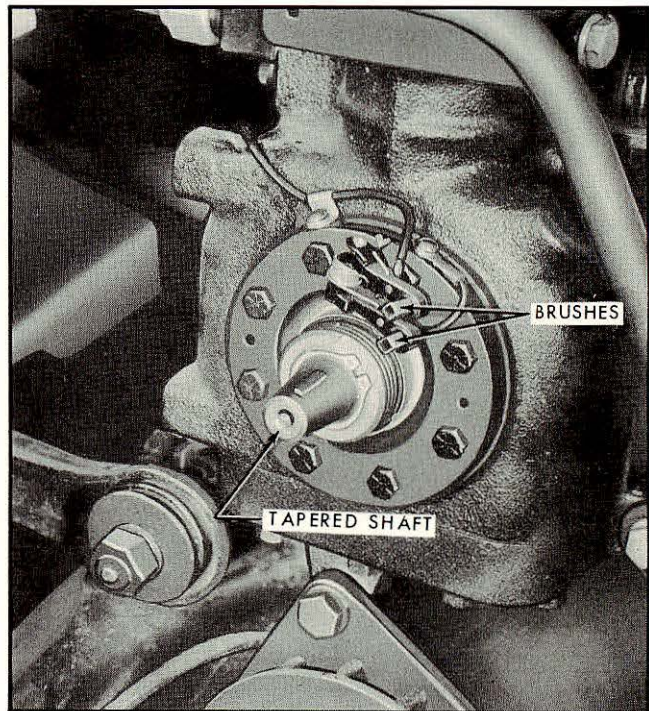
COMPRESSOR ASSEMBLY, CLUTCH REMOVED
